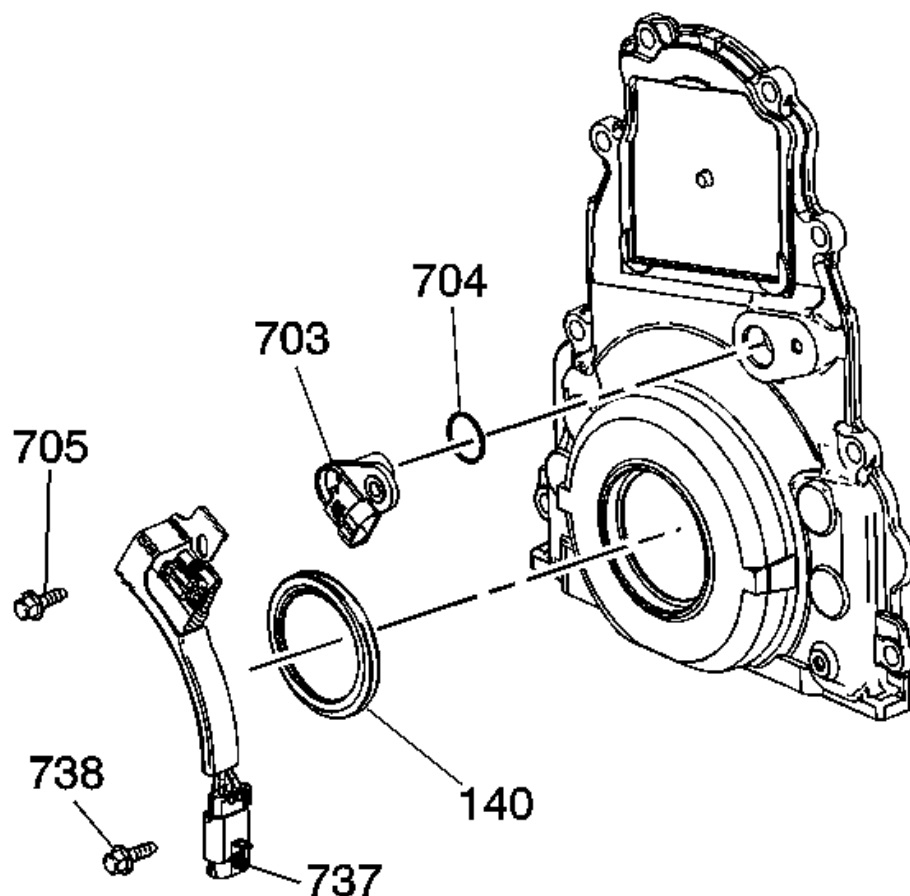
Engine Front Cover, Camshaft Position Sensor, Oil Seal, Wire Harness, O-Ring & Bolts
